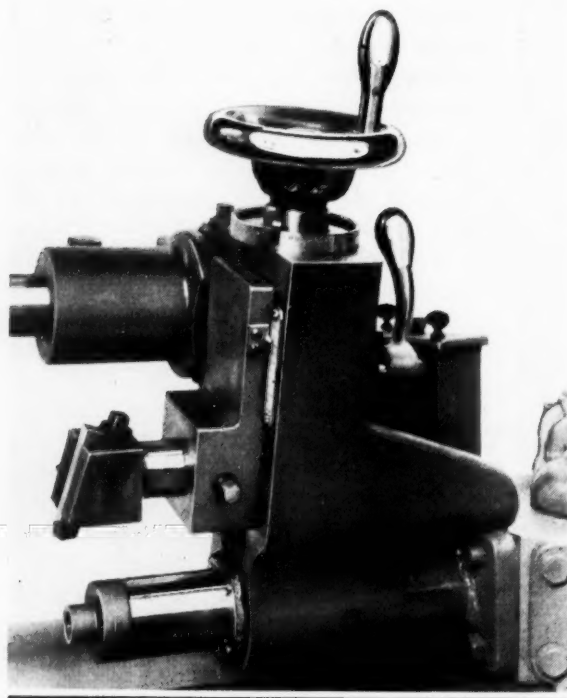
Turret Lathe Tool with Hydraulically Operated Work-supporting Center
